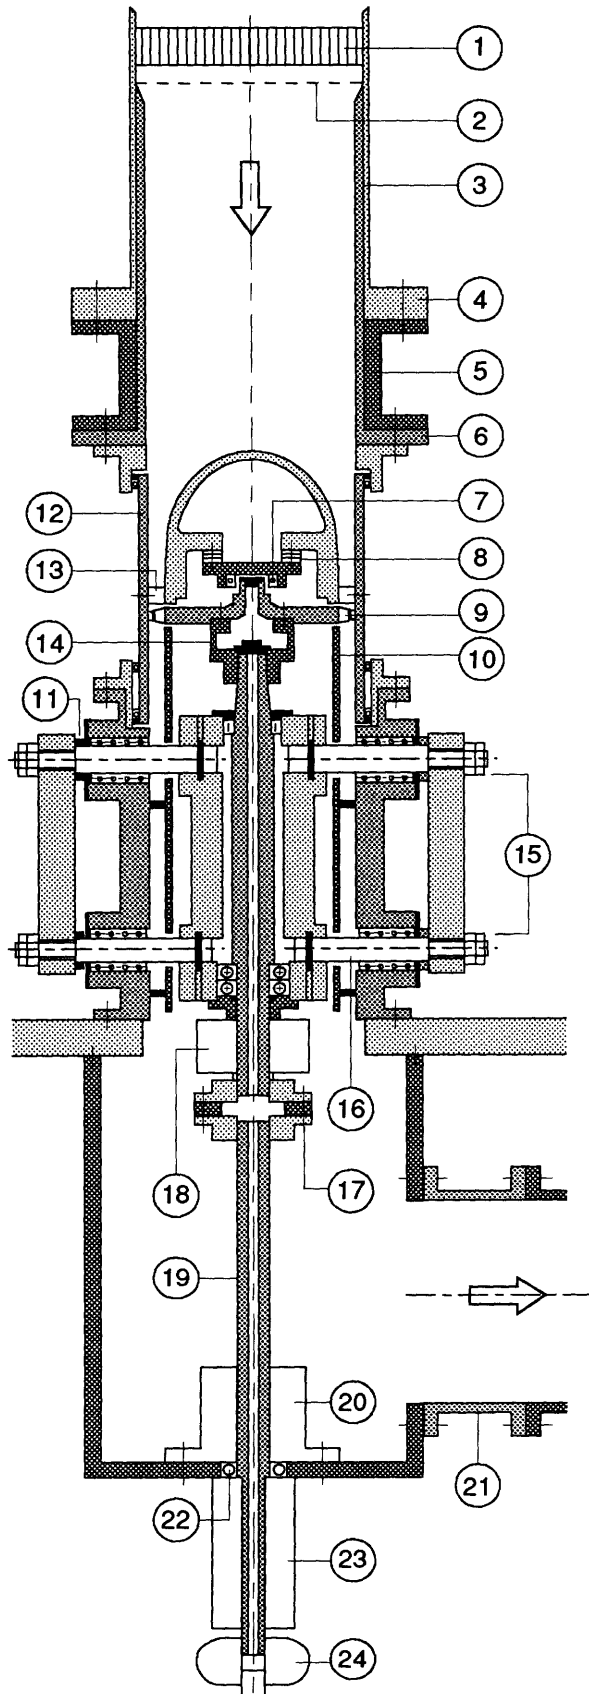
Machine Drawing of Turbine Test Rotor [13]
